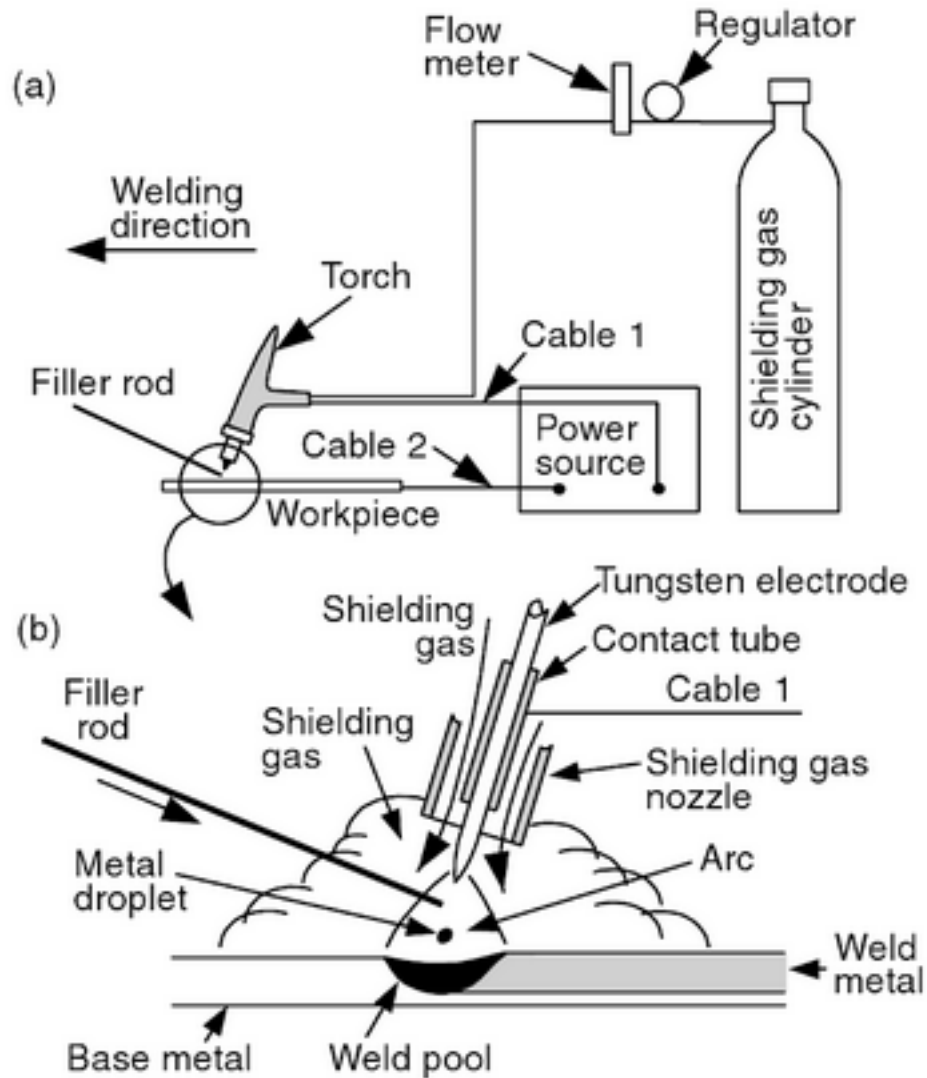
(a) Schematic of the wiring required for GTAW welding. (b) Schematic of the internal components and functioning of GTAW (TIG) torches [46].
